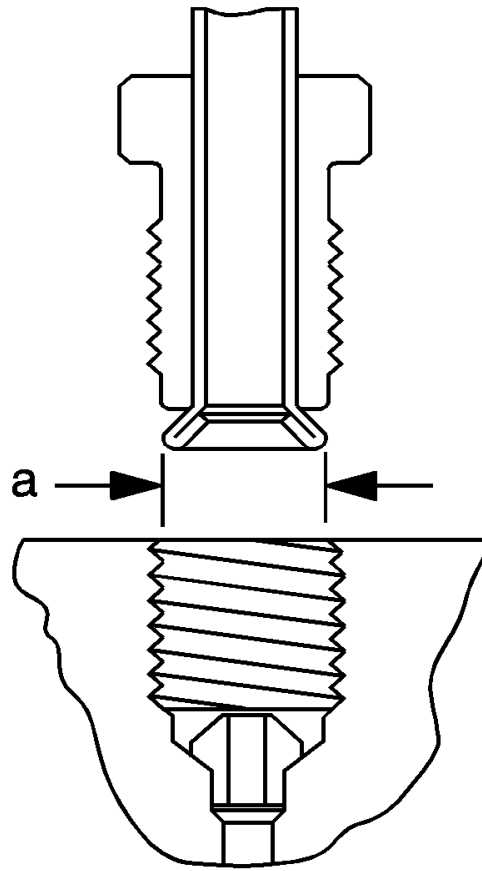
Identifying Correct Brake Pipe Flare Shape & Diameter
